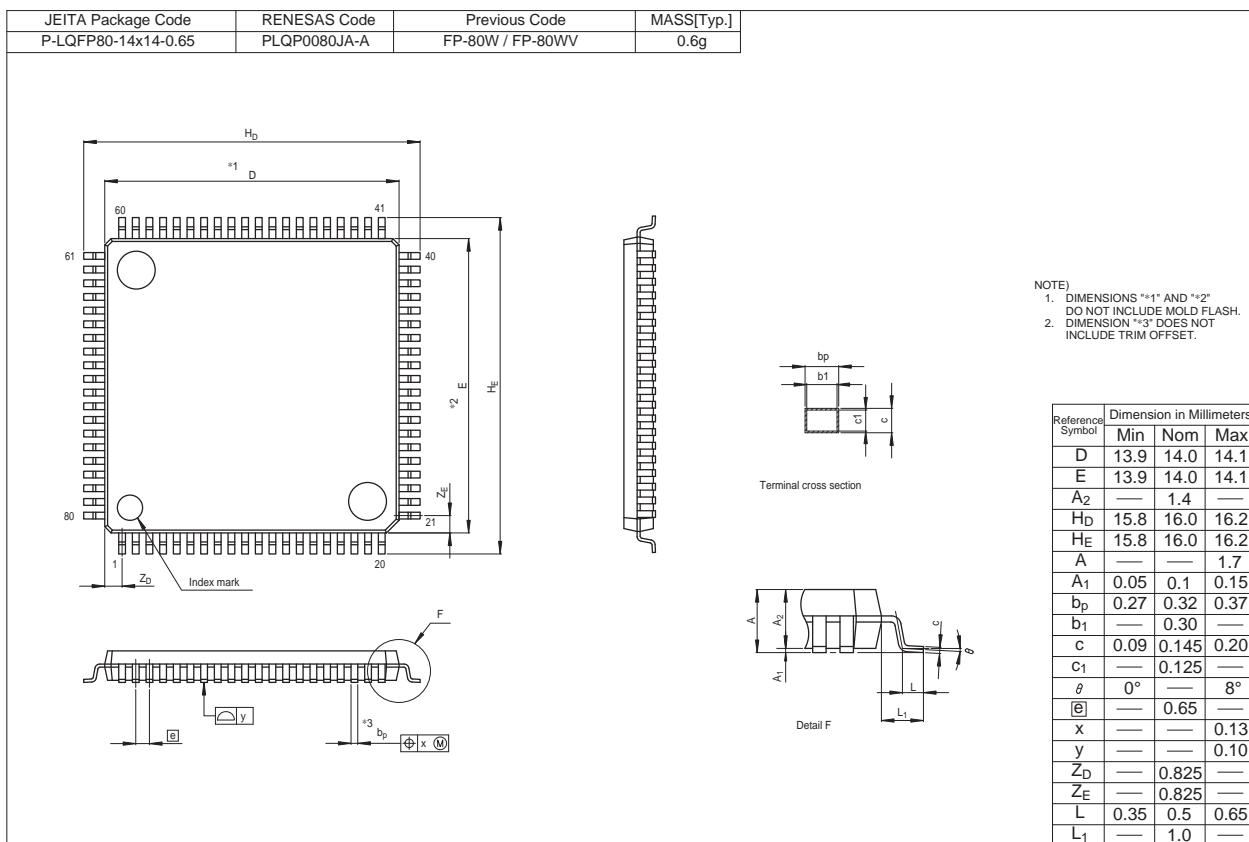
Pin LQFP (PLQP0080JA-A) Package Dimensions
